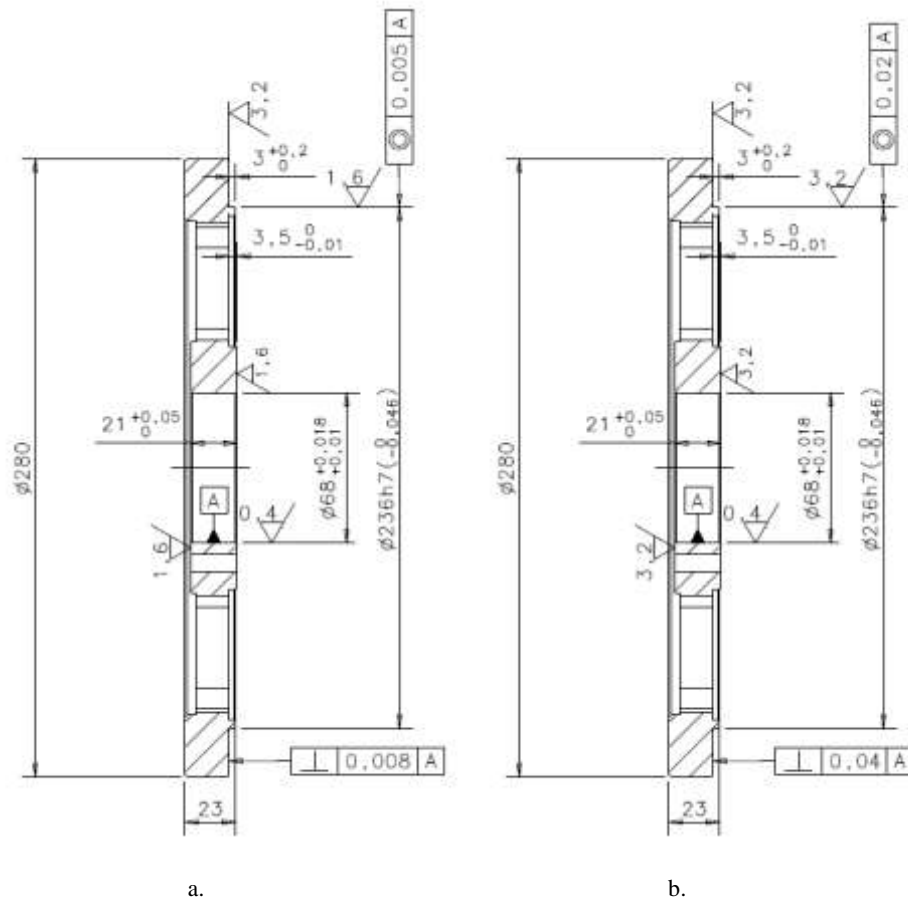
Measurement drawing for a. prototype motor bearing end shields b. end shields with altered tolerances.
